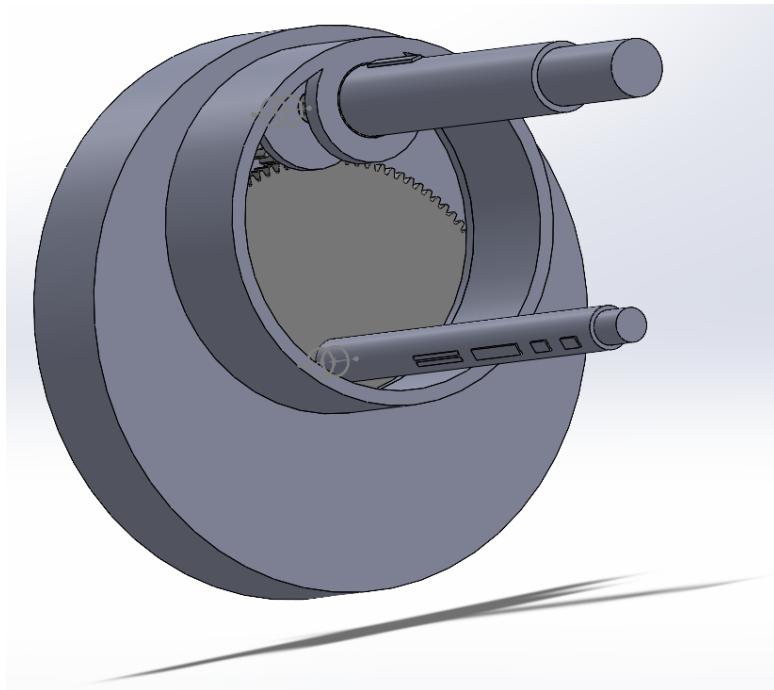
InShaft and CounterShaft bores in the case and the corresponding bearings.
